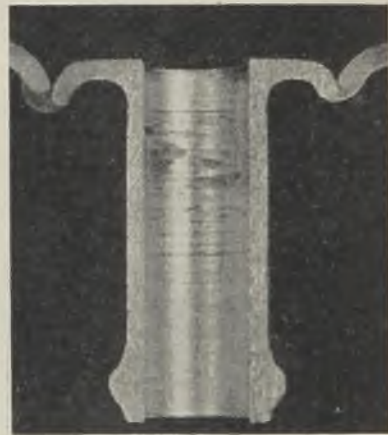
SHOWING THE METHOD OF ATTACHING THE PIPE BY WELDING. $\times 2$.
